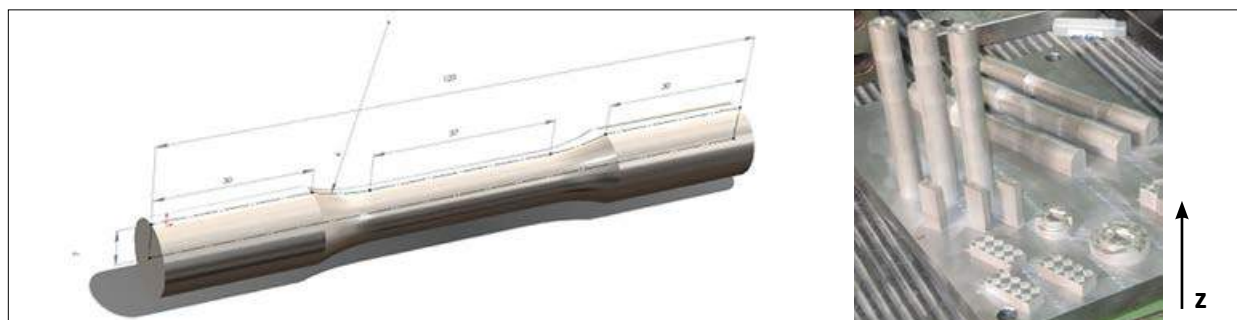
CAD sketch of a standard tensile testing specimen and image of the SLM processed parts [2]
